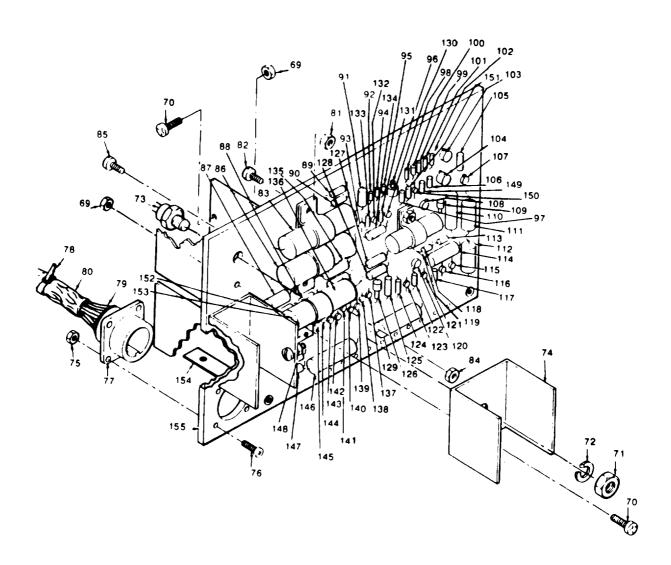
Static Exciter and Voltage Regulator Assembly, Exploded View (Sheet 2 of 3)
